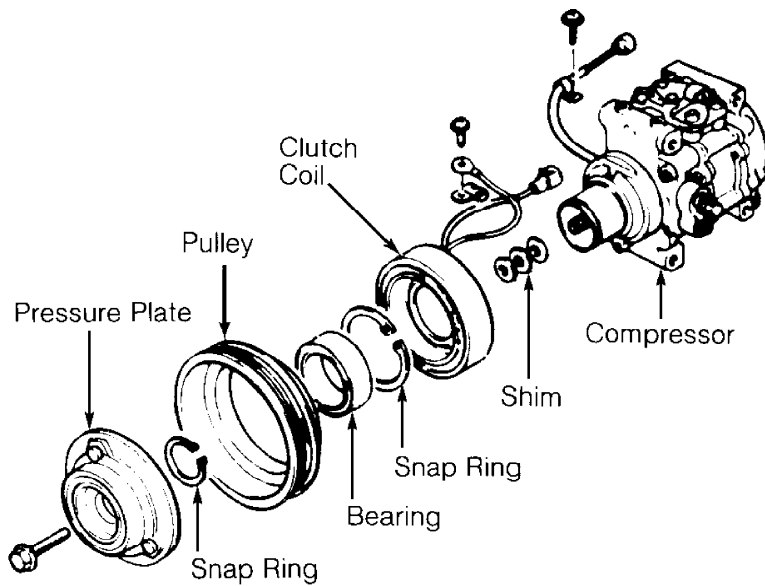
Exploded View Of Compressor (Matsushita Rotary Vane)
